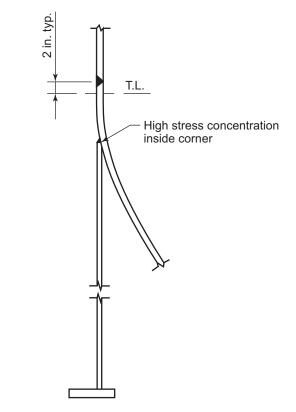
Typical Skirt-to-Shell Fillet Weld Detail Used in Earlier Drum Construction
